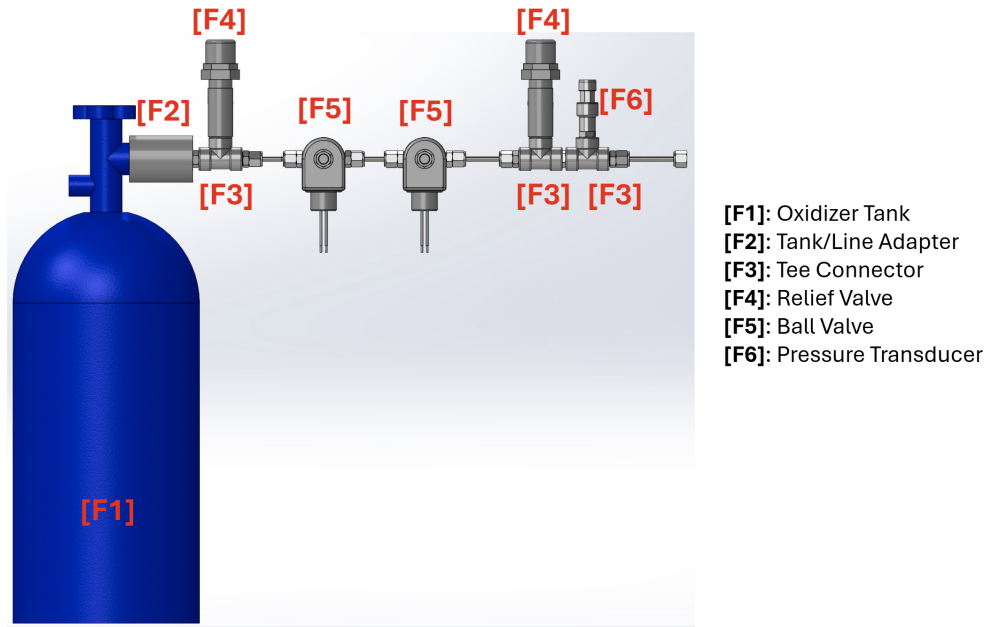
Oxidizer subsystem assembly CAD. Note that this view depicts all components for easy viewing, and is not representative of the plumbing arrangement in the actual assembly.
